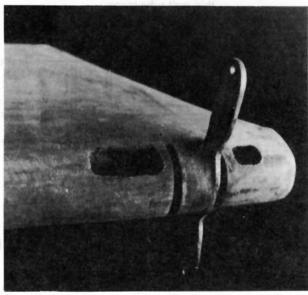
Rudder lower hinge. Dynel and foam ground away for access to hinge bolt.
